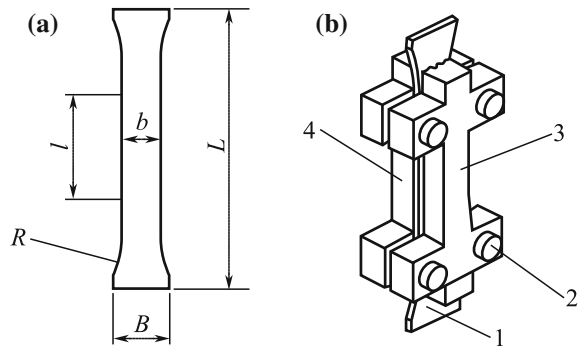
Schematics of specimen and fixture for end loading compression testing (ASTM D695). 1—Specimen; 2—crimping bolts; 3, 4—lateral grooved plates
